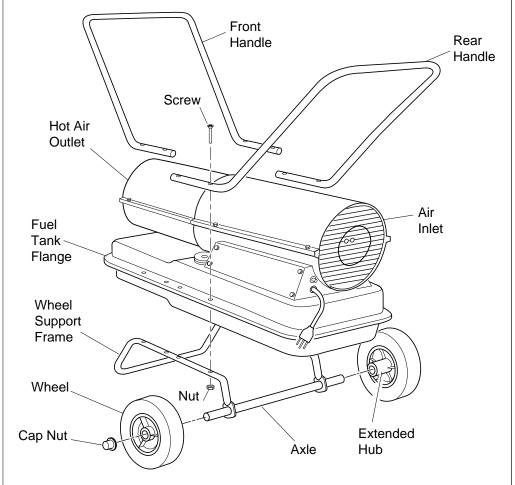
Wheel and Handle Assembly, 100/150,000 BTU/Hr Models Only
